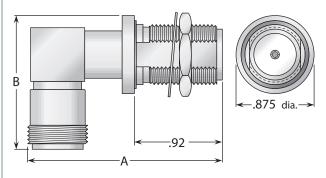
(Bulkhead mounted right angle jack-jack; connects two plugs)
